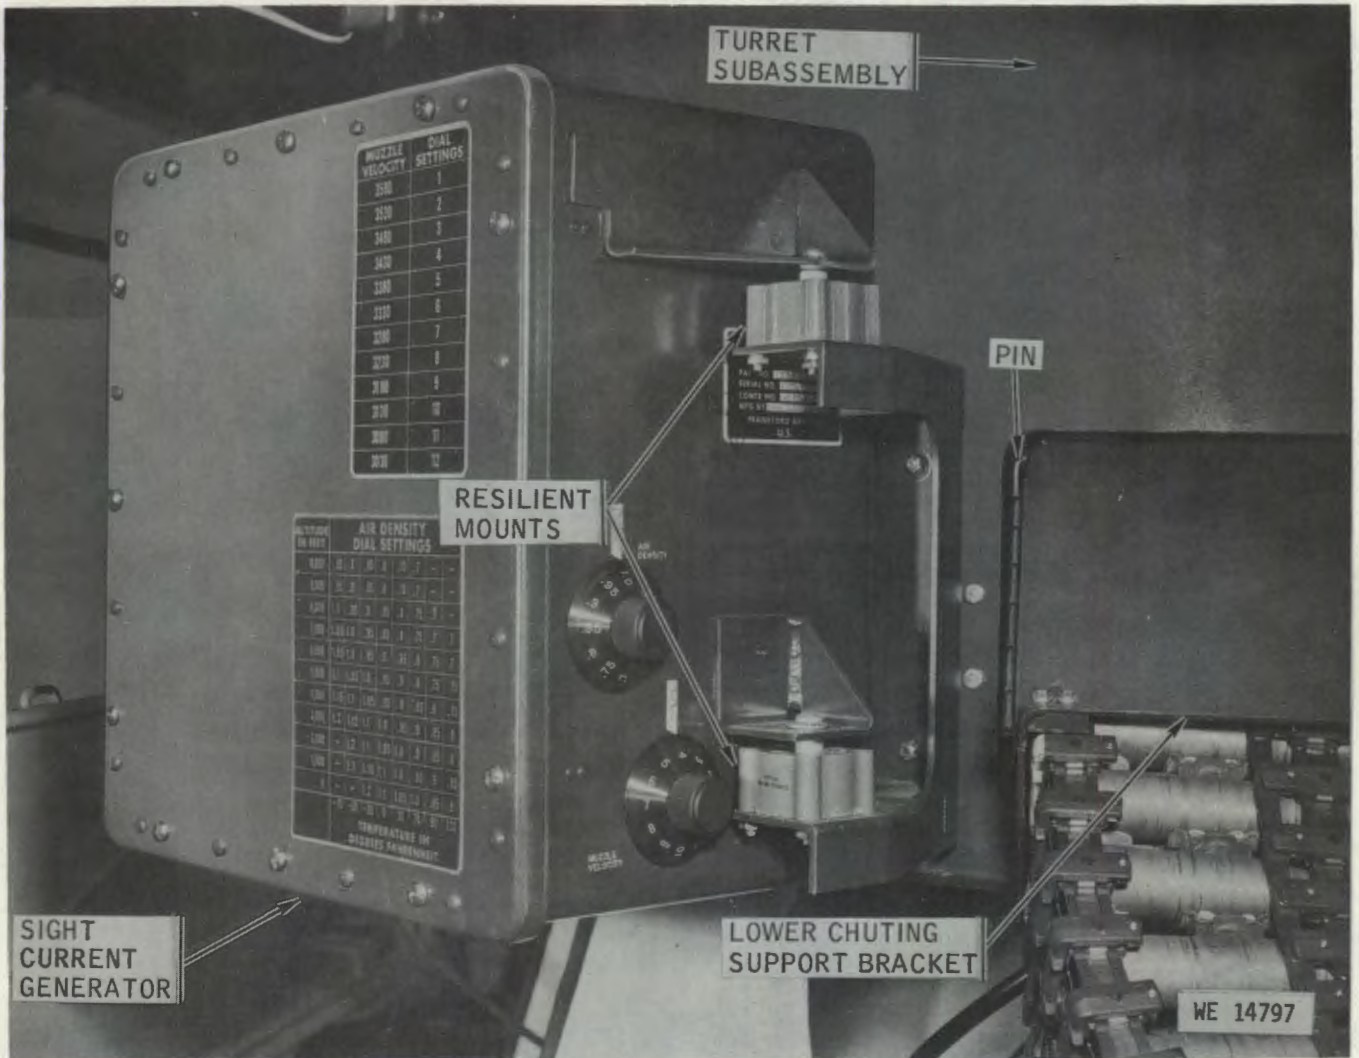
Turret subassembly, exterior view showing lower chuting support bracket and sight current generator mountings.
